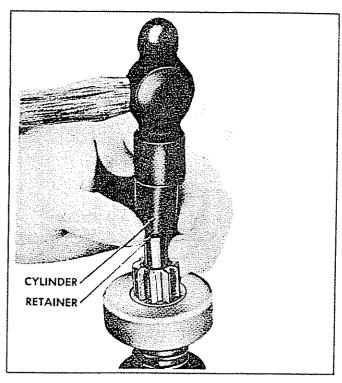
D-18s--Forcing Snap Ring Over Shaft
